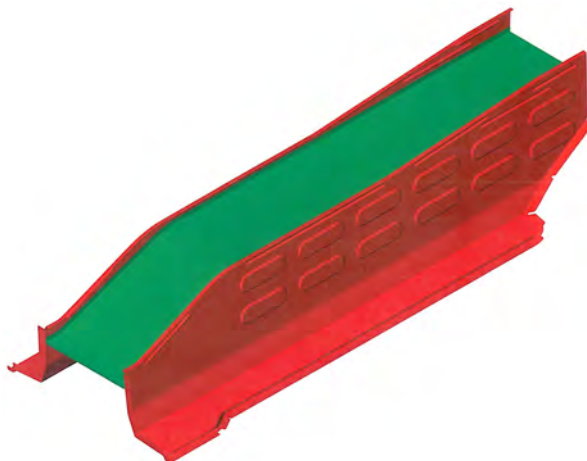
50.1 1112 Tunnel sub-assembly
